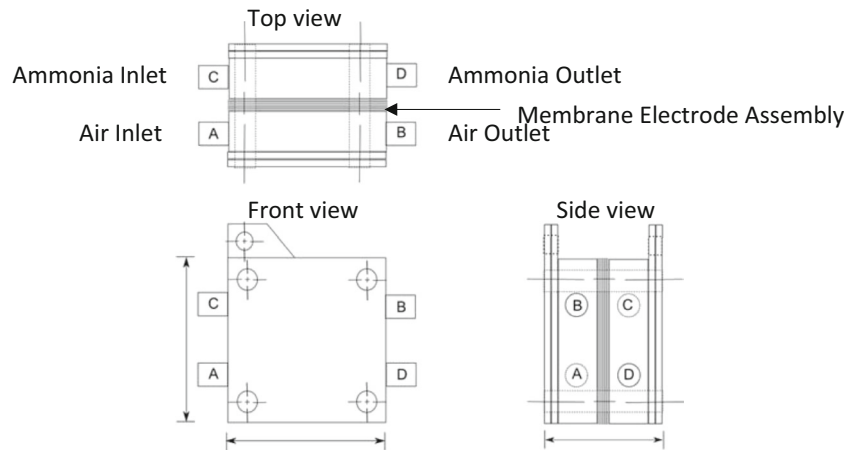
Exploded side view of the direct ammonia alkaline fuel cell
